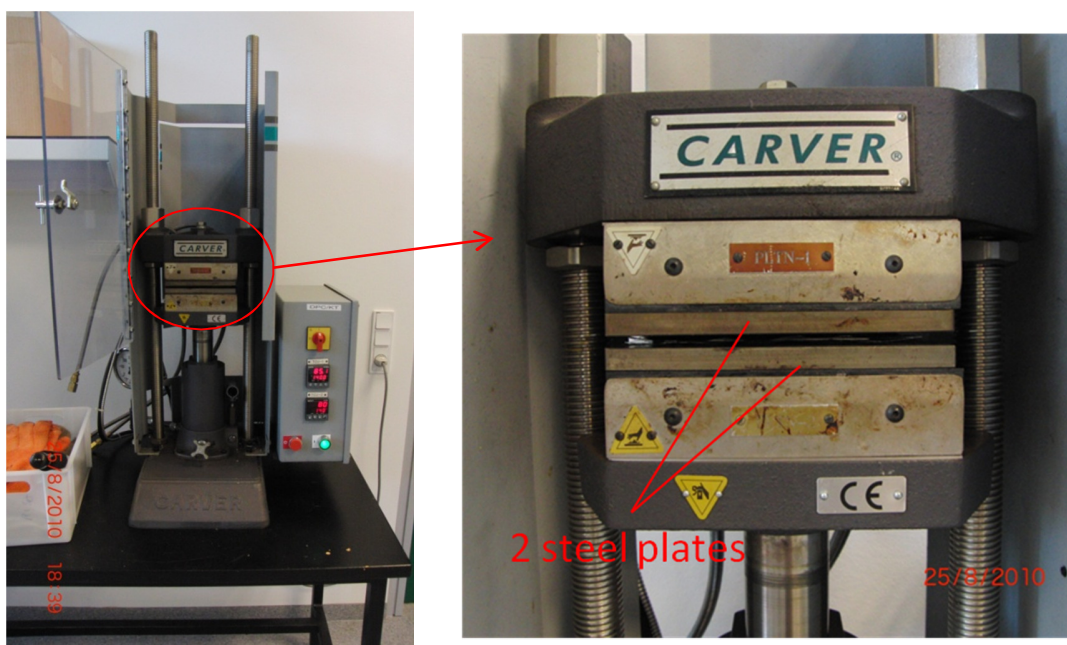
(left) the hot embossing equipment; (right) the steel plates
